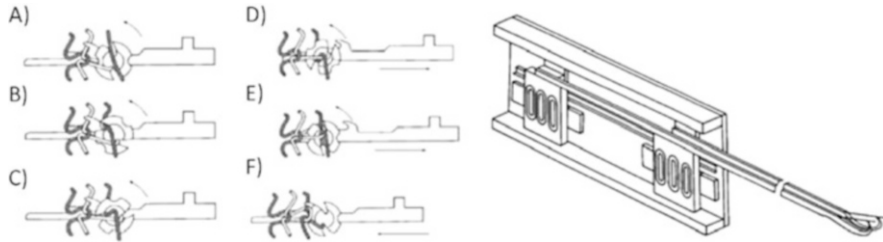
Stitch formation using rotating stitch-forming elements [16], single-needle drive by linear motors [17]
